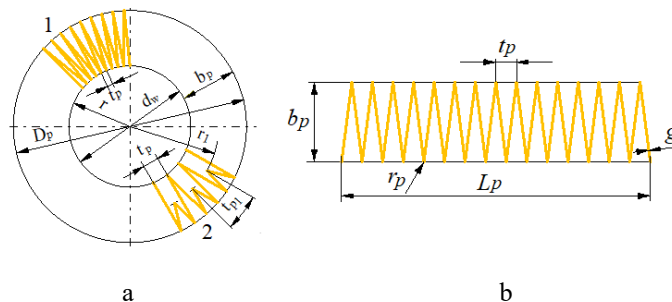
Forming the pleats of filter paper: a) cylindrical insert (1 – V-shaped, 2 – W-shaped), b) panel insert, D_p – outer diameter of the cylindrical part, d_w – inner diameter of the cylindrical part, b_p – pleat height, t_p – pleat spacing, pitch, L_p – panel length, g – paper thickness, r_p – pleat bend radius
